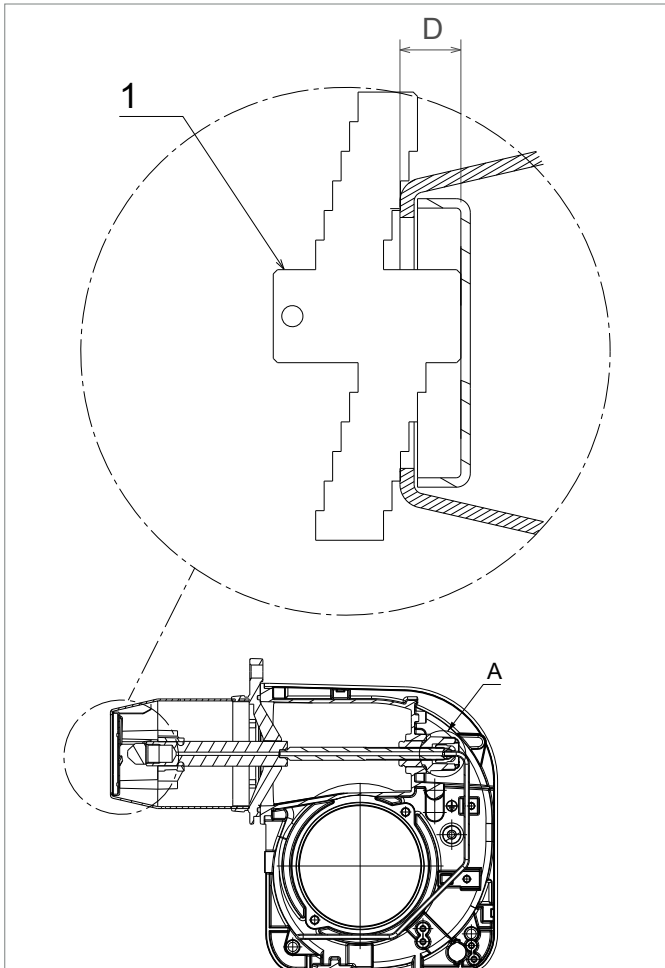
Riello RDB 2.2 BX diffuser position and gauge plate
